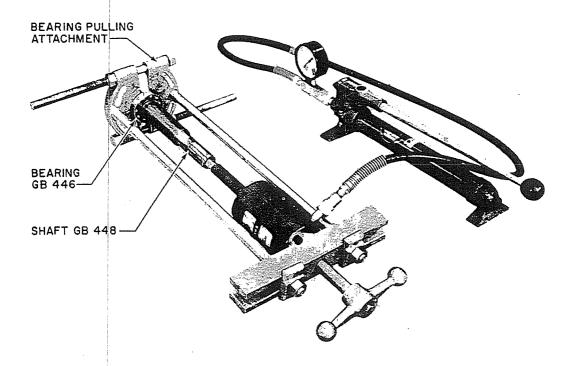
4 to 1 Shaft, Installation of Bearing GB446
